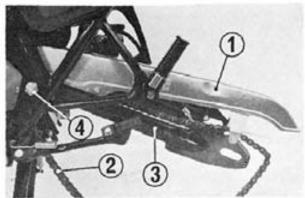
① Drive chain case ③ Self-locking nut ② Drive chain
